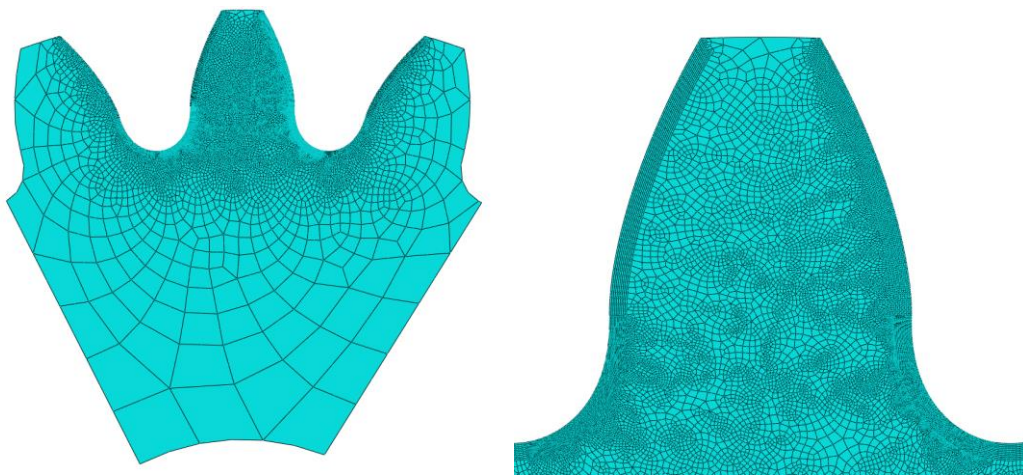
External asymmetric spur gear tooth 2D FE model
